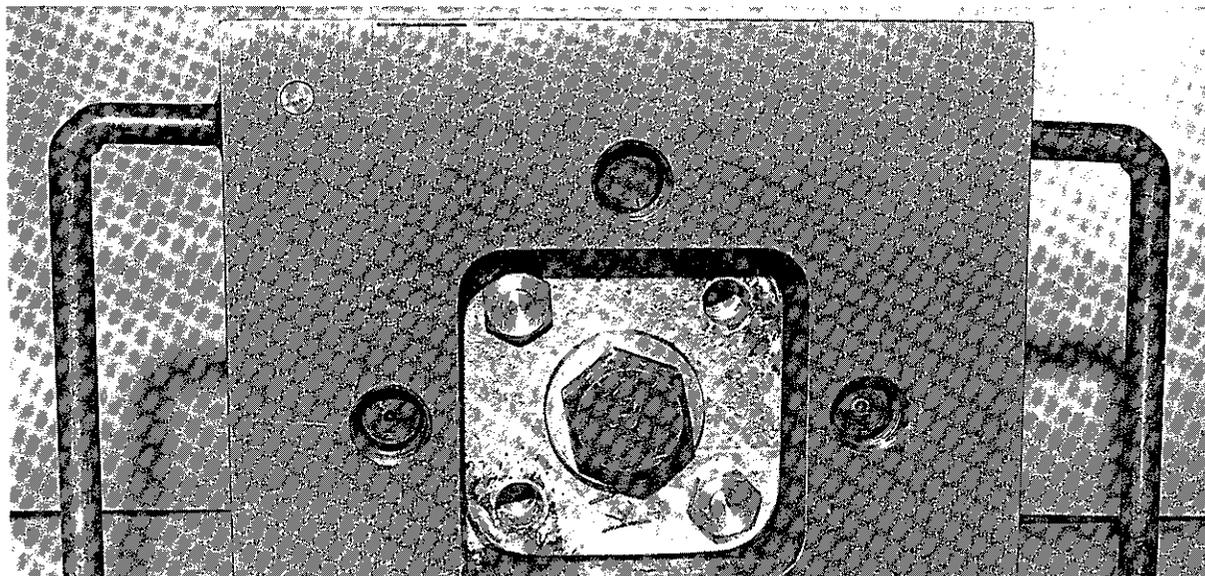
Top view of fixture for testing 5/8-inch-diameter cap screws.
